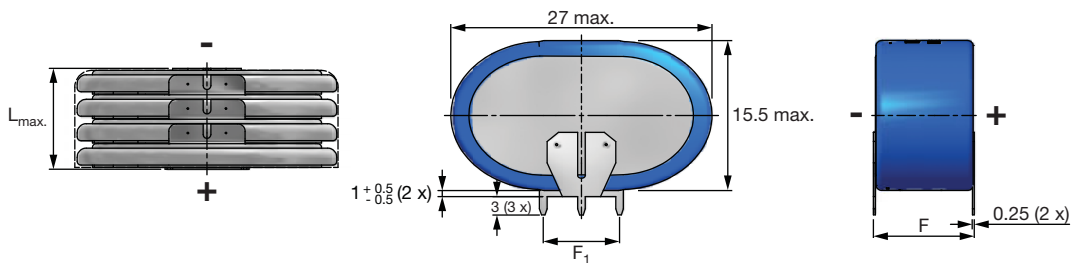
Form I: Stacked Through Hole Oval (PCBD)
